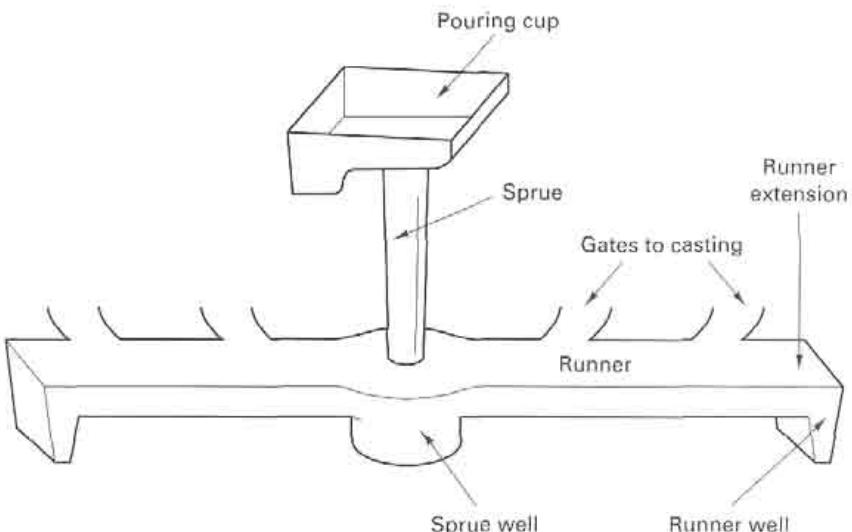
Typical gating system for a horizontal parting plane mold, showing key components involved in controlling the flow of metal into the mold cavity.
